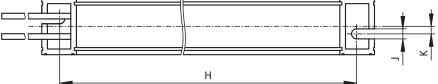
PMC GVADU, PMC GBADU dimensional drawing
